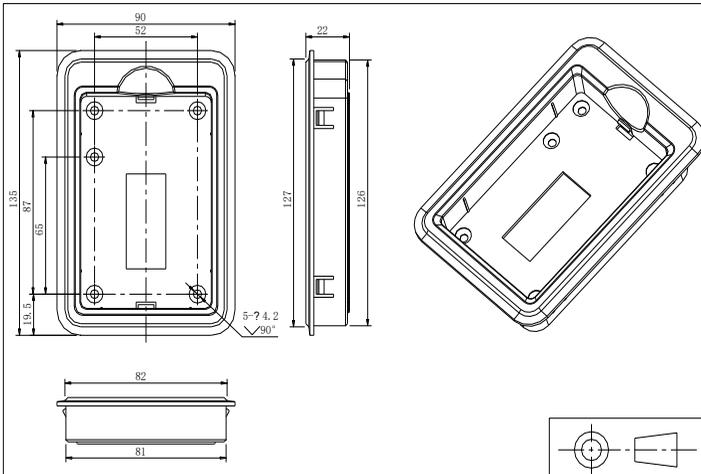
ST500 Keypad Mounting Frame Dimensions (in mm)
